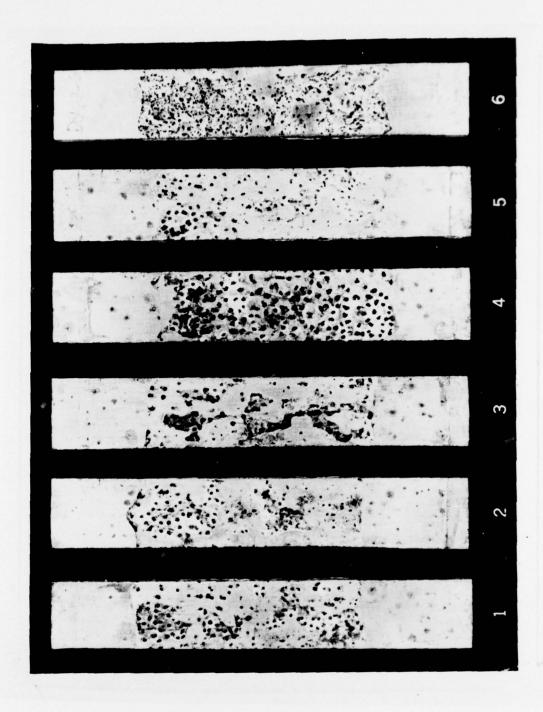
LOCKALLOY STRESS-CORROSION TEST SPECIMENS
